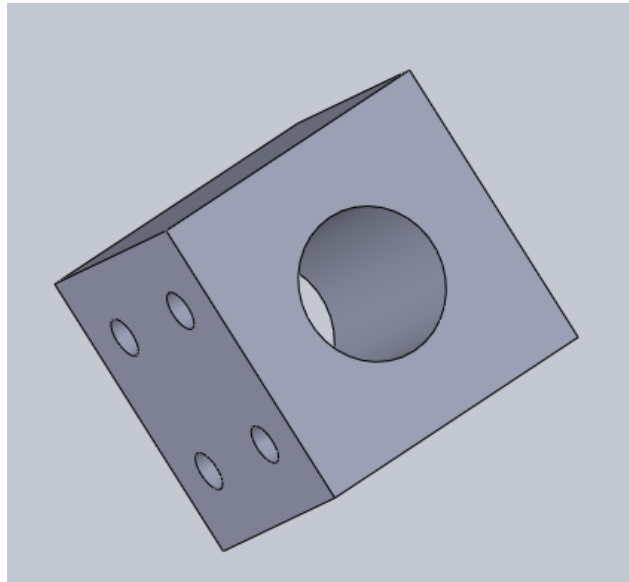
BEARING SLEEVE MOUNTING BLOCK
